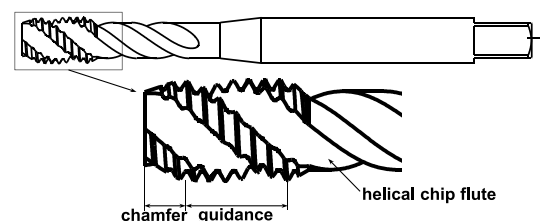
Segmentation of the tapping tool cutting edges into the chamfer and guidance part
